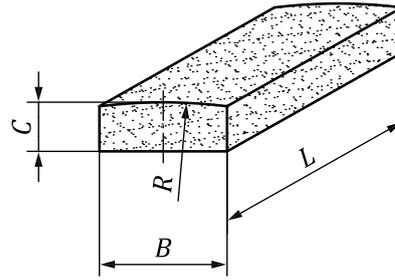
Grinding segment, rectangular shape, with outer radius (Type 31F)
